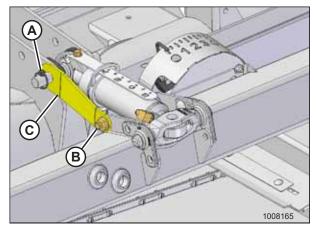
Lynch Pin, Hardware, and Shipping Brace
